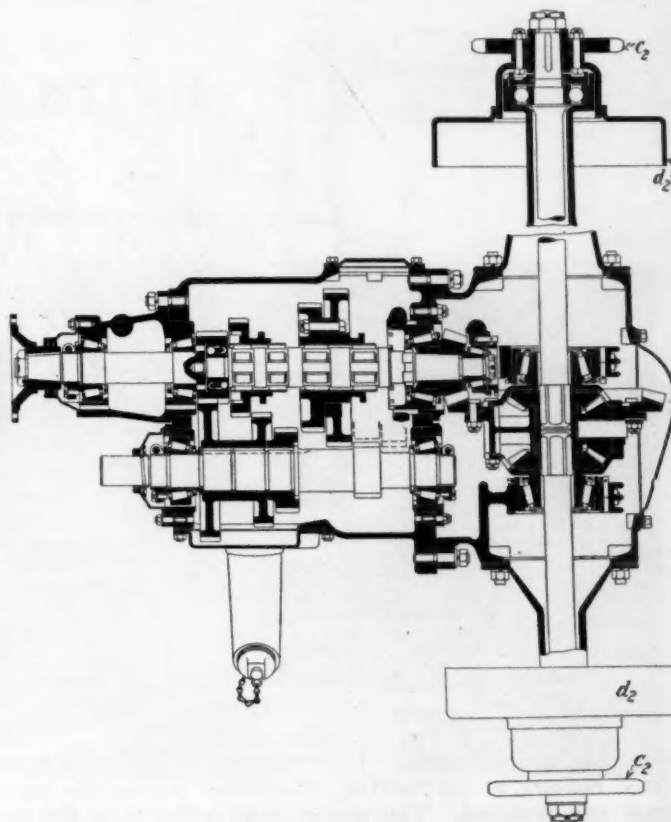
SECTIONAL VIEW THROUGH THE TRANSMISSION AND JACK SHAFT OF A CHAIN-DRIVEN TRUCK
